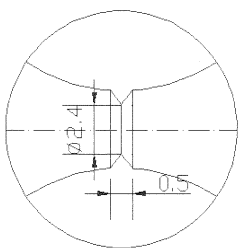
V-notch profile at reduced section of hour-glass specimen (dimensions in mm).
